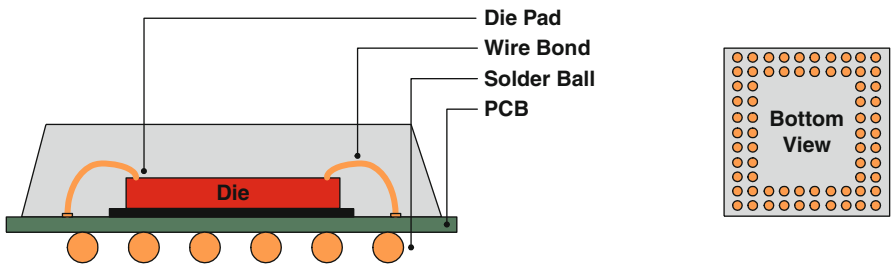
Cross-section of ball grid array with wire bonding package
